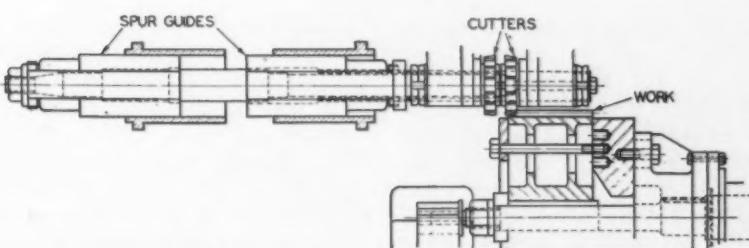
Straight tooth gear being cut with two cutters, one cutter working on one stroke and the other on the opposite stroke.
